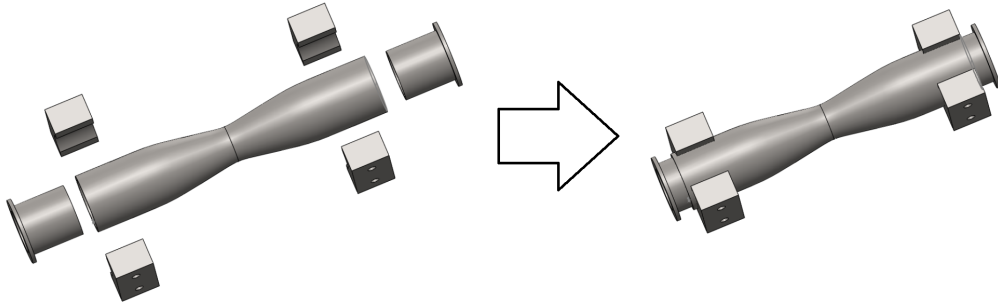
Assembly of grips and diabolo shape sample for tension-torsion tests.
